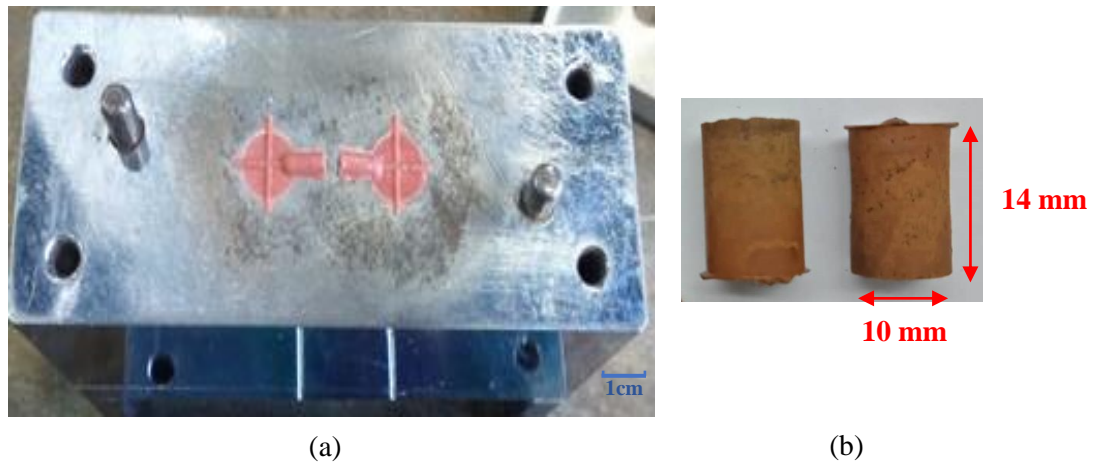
; (a) The cavity of the mould is entirely filled by feedstock, (b) Solidified cylinder green part of porous Cu
